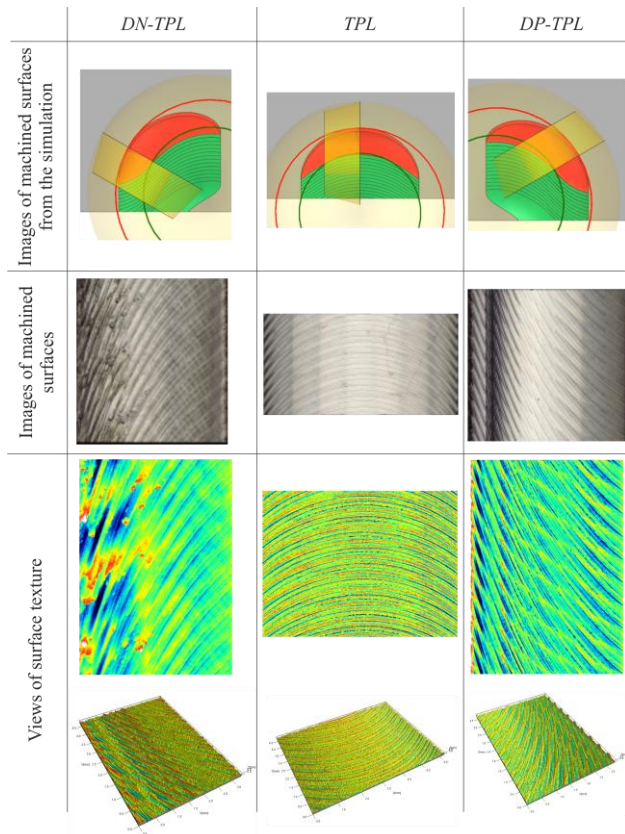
Images of machined surfaces and views of surface texture after multi-axis milling using the torus milling cutter.
